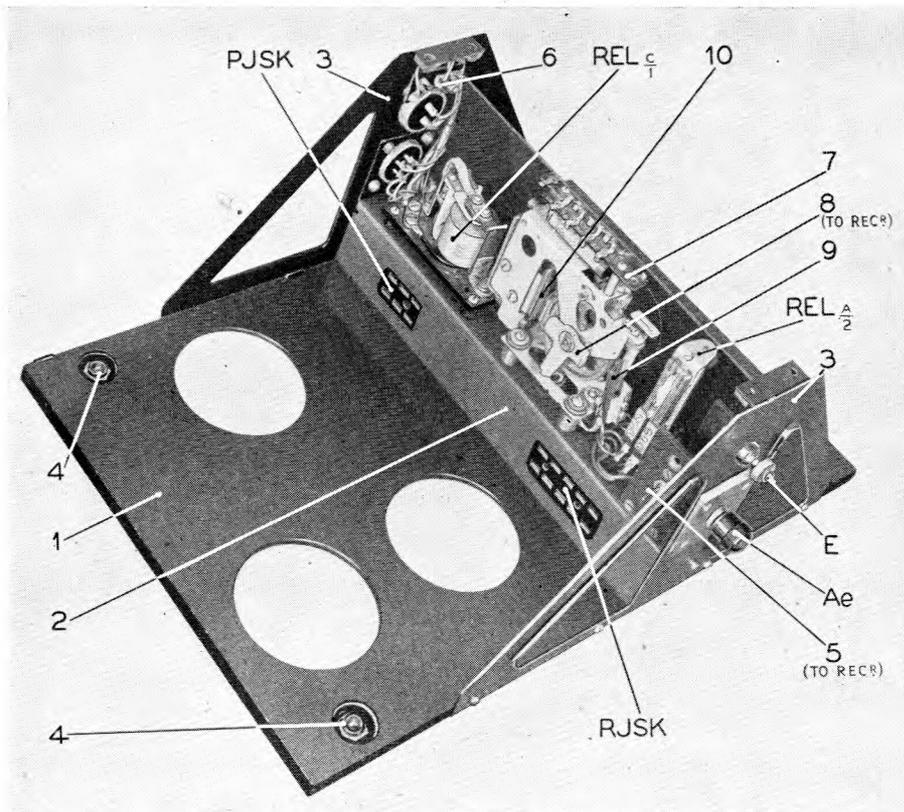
CHASSIS ASSEMBLY, FROM RIGHT-HAND SIDE
